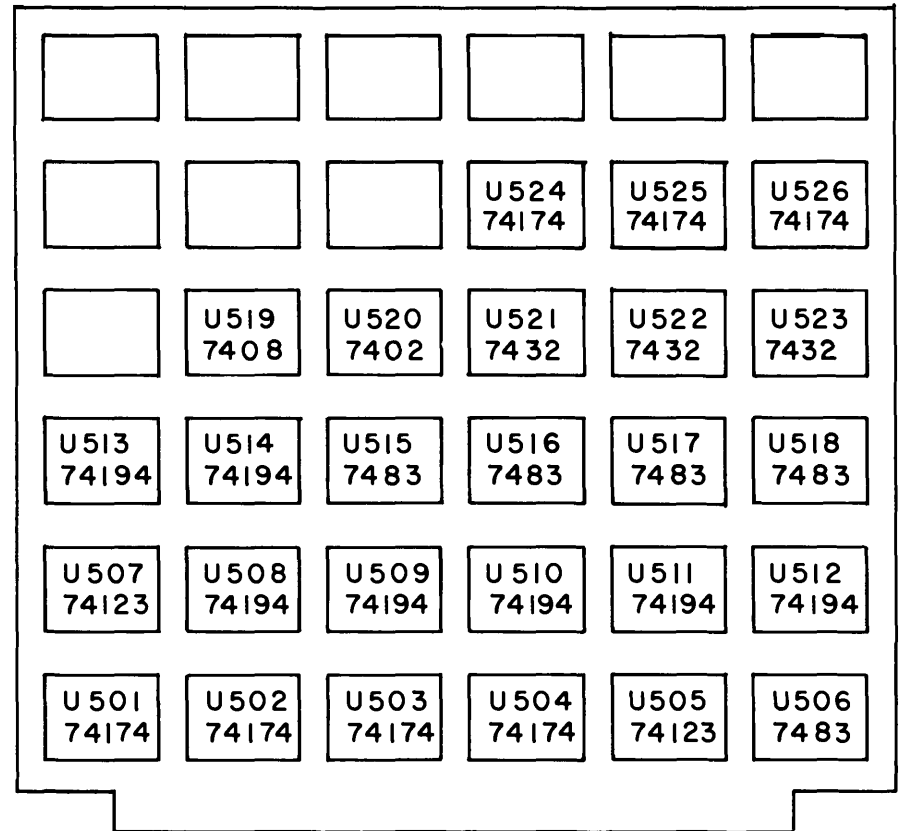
CARD C1 INPUT SIGNAL CONDITIONING BOARD LAYOUT SHOWING LOCATION OF COMPONENTS
